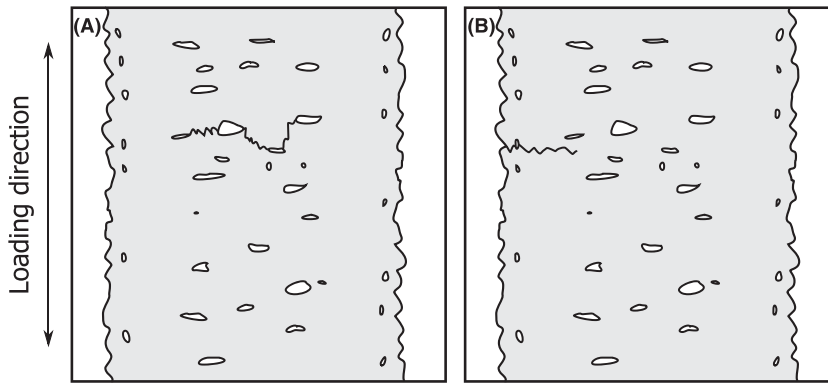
Failure mechanisms in specimens. Schematic illustration of A, failure from internal defects and B, failure from surface defects
